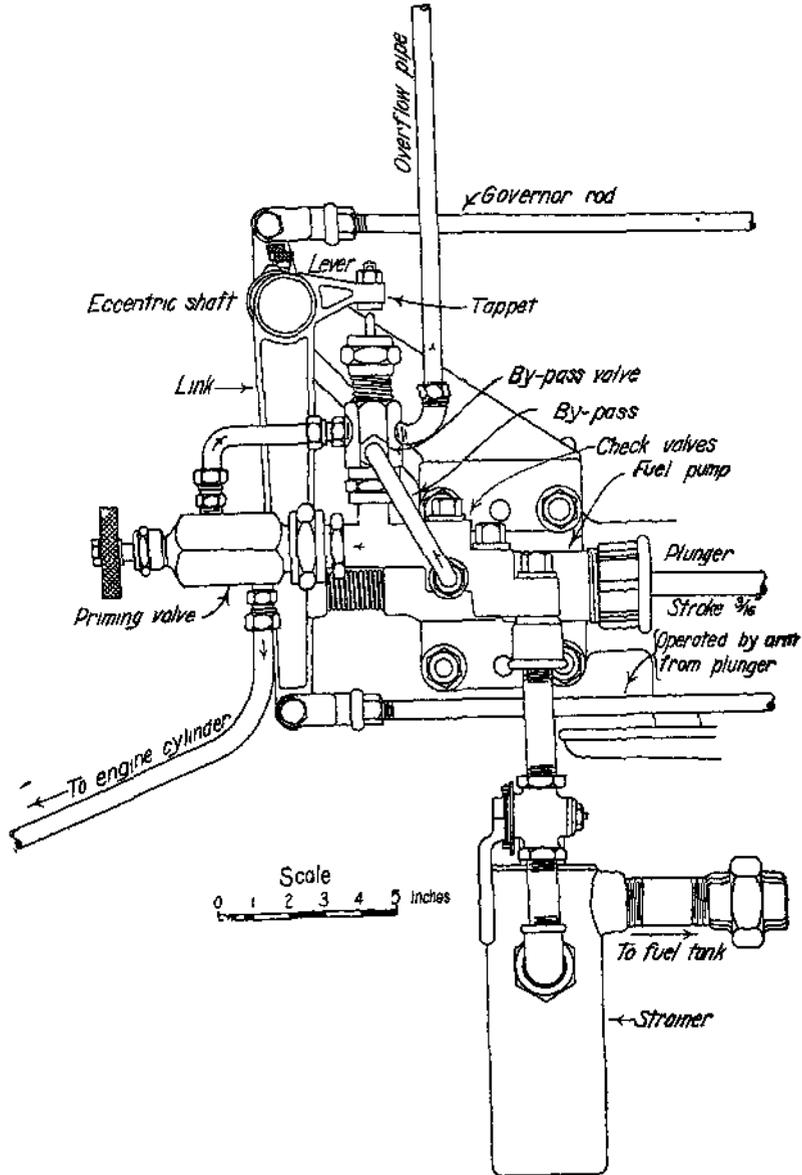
Fuel injection pump and governor valve of Engine No 6
